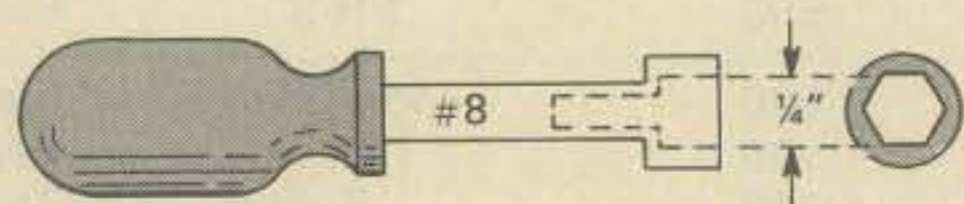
Typical socket wrench. Size #8 stamped on the shank indicates  $\frac{1}{4}$ " size.
